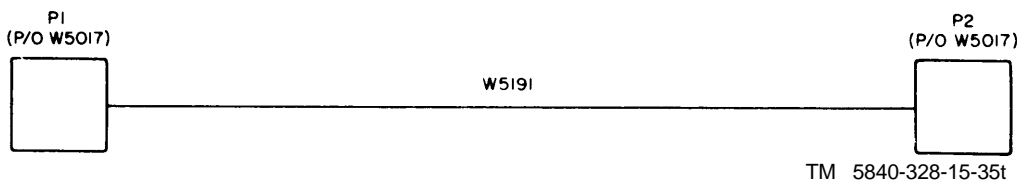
Special Purpose Cable Assembly CX-3353/PPS-5, schematic diagram.
